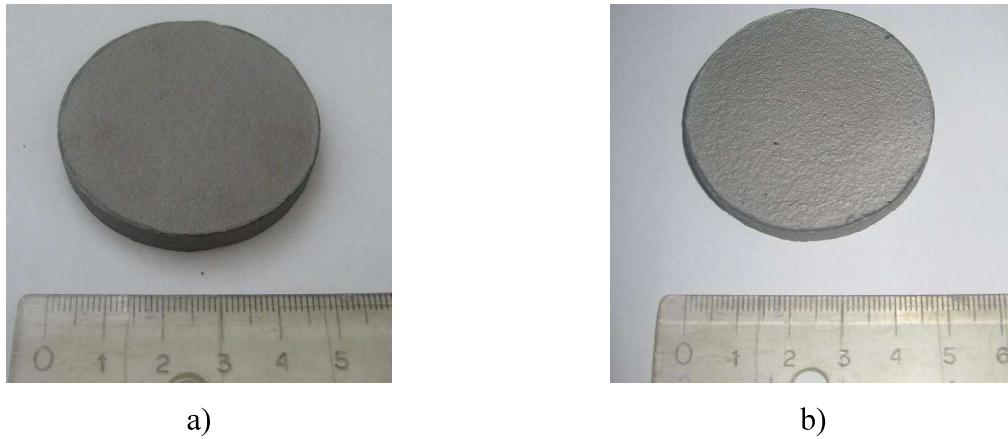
Macroscopic view of sintered ODS samples. a) austenitic ODS, b) martensitic ODS.
